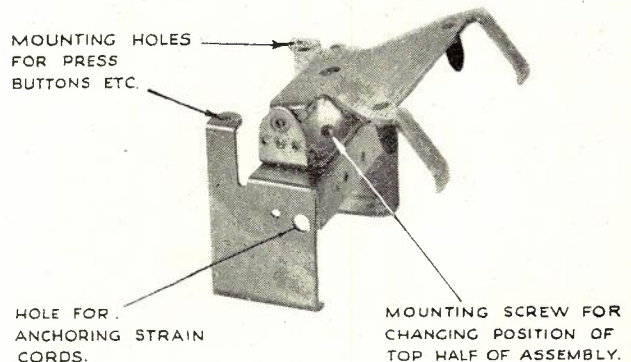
Switch-bracket Assembled for Use on Table Telephones.
